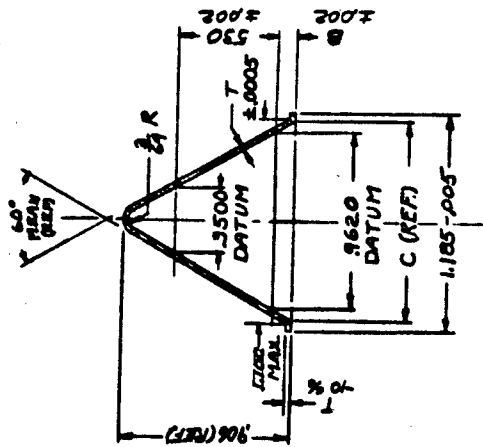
Alternate Initiator Test Assembly - 1.1 in. Body, 1-Caliber Head.
